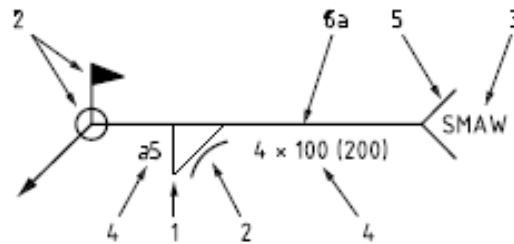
Examples of the use of a tail on welding symbols
